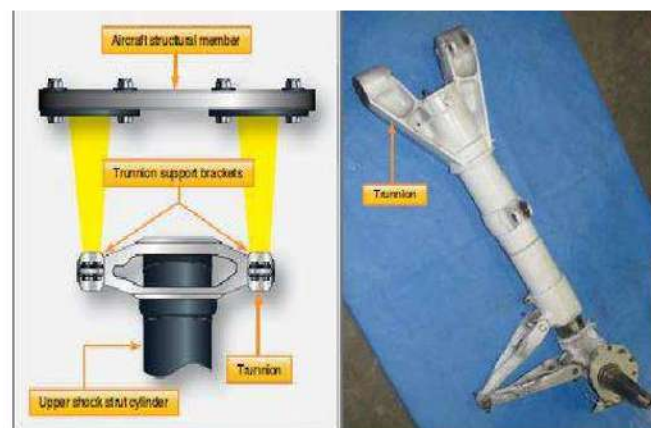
The trunnion is a fixed structural support that is part of or attached to the upper strut cylinder of a landing gear strut. It contains bearing surfaces so the gear can retract.
